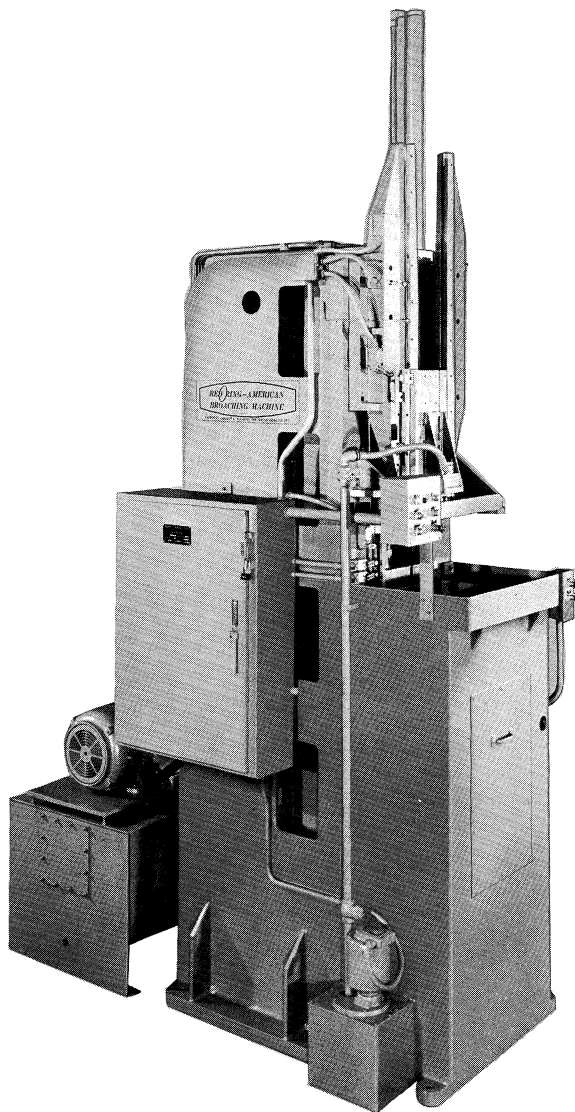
D Red Ring-American Type T, three-way broaching machine for 'push-down', 'pull-down' or surface broaching.
